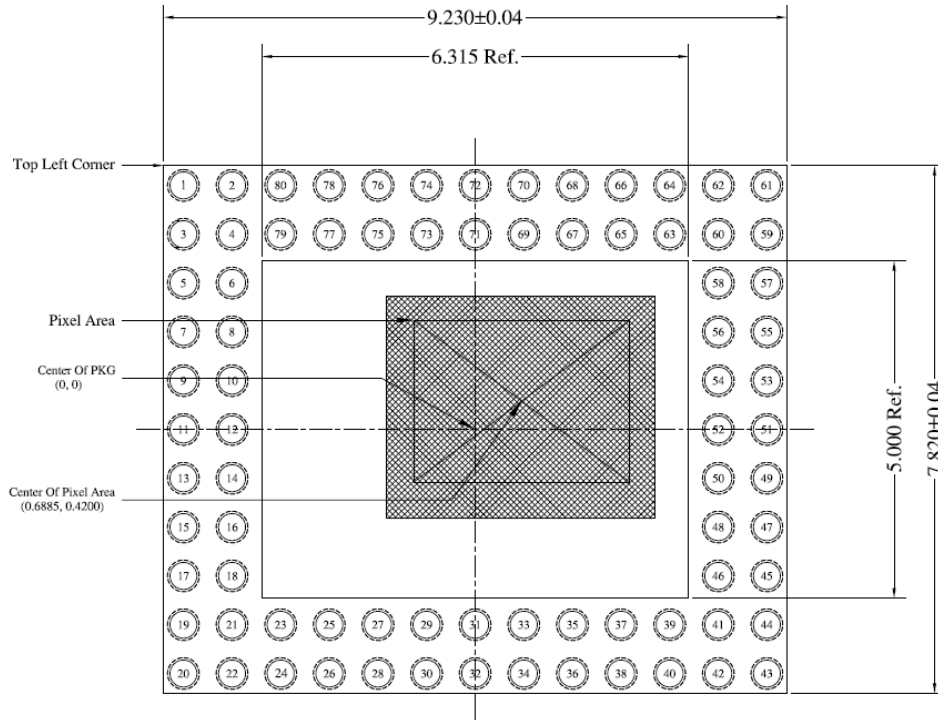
Mechanical Outline TOP VIEW (in mm)
